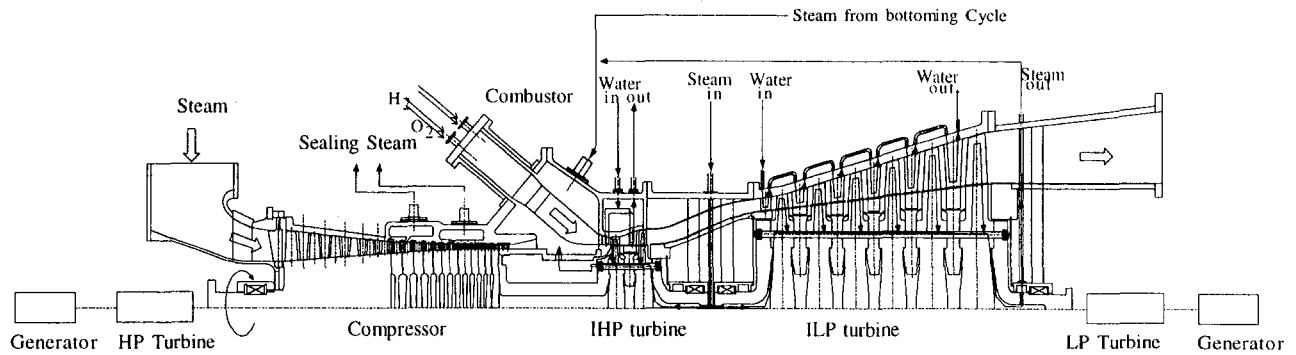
Schematic view of gas path and cooling circuits of gas turbine
